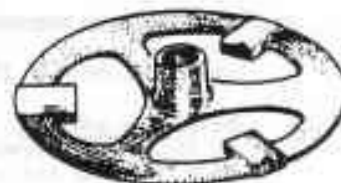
BORG & BECK LEVER ADJUSTMENT GAUGE.
